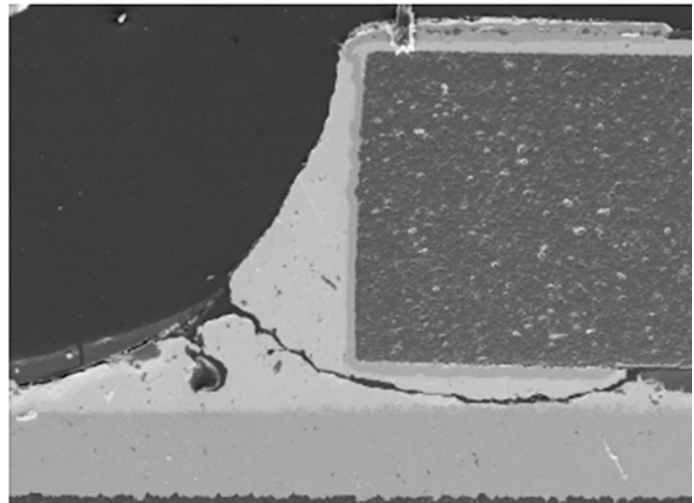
2512 Size Chip Resistor Showing Cracking at Solder Joint
